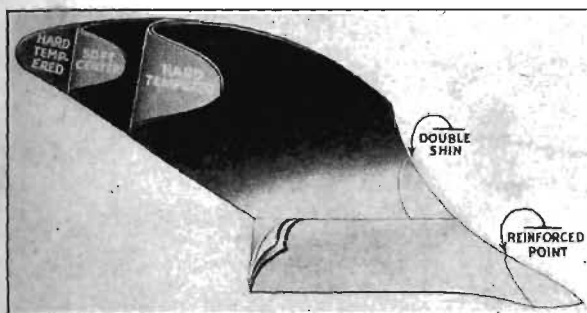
Plow bottom showing soft-centered moldboard and share and method of reinforcing point of share and shin of moldboard.
